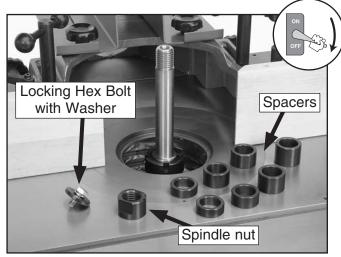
Spindle, locking hex bolt with washer, spindle nut, and spacers.
